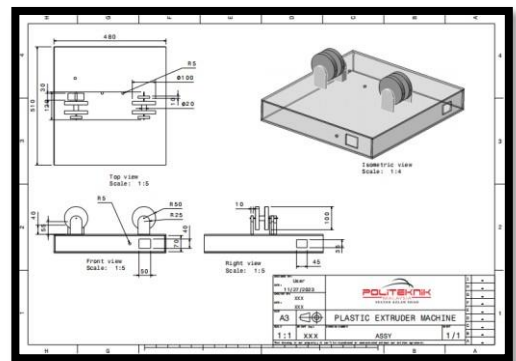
Assembly drawing for mechanical parts (top, front and side view)
